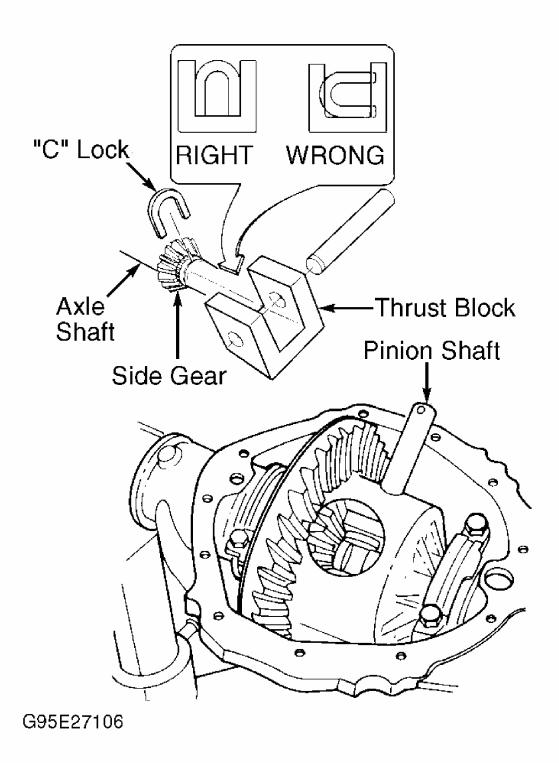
Removing & Installing "C" Lock & Pinion Shaft On Locking Differential (Typical)
